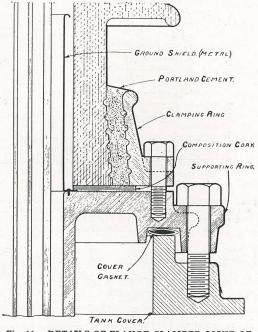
DETAILS OF FLANGE CLAMPED JOINT OF FILLED TYPE HIGH VOLTAGE BUSHINGS
